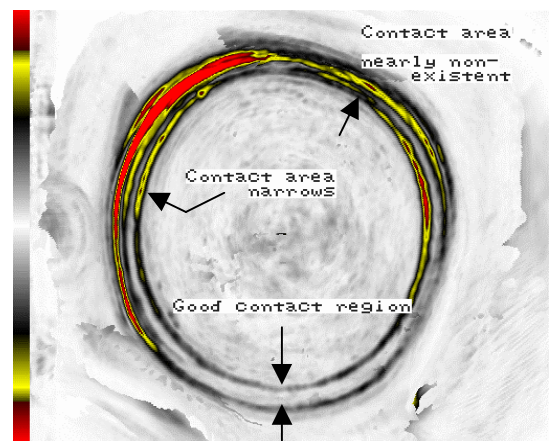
Initial acoustic image of failed assembly, showing seal between tube and threadsaver.
